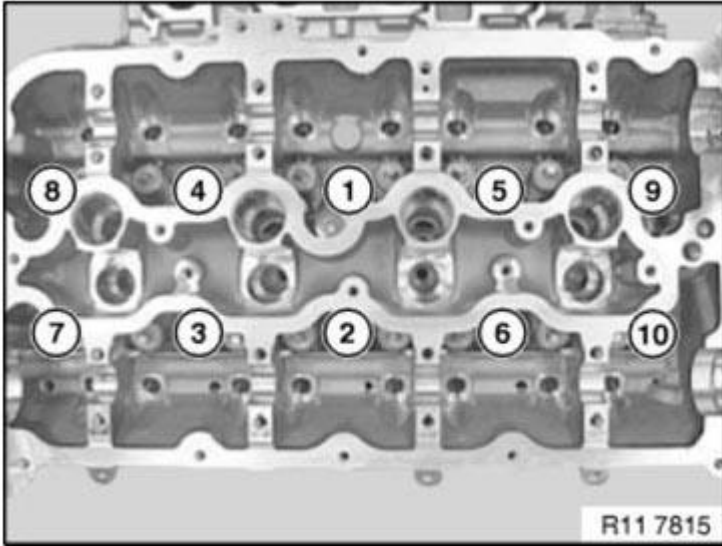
Identifying Cylinder Head Bolts Tightening Sequence
